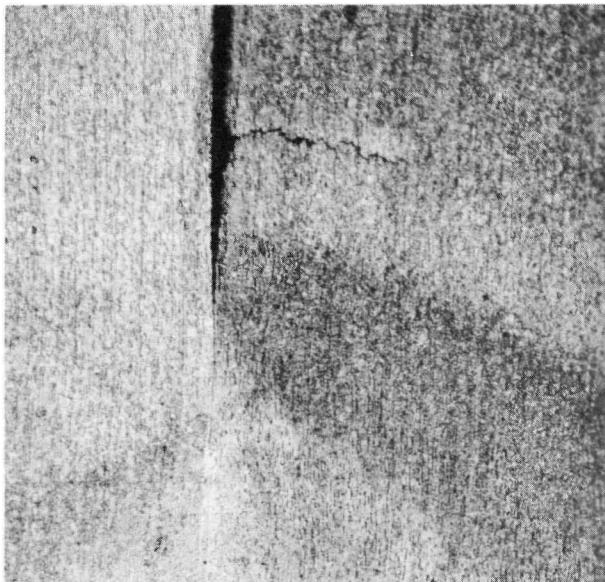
Bellows Weld Bead Cross-Sections — Material AM-350
